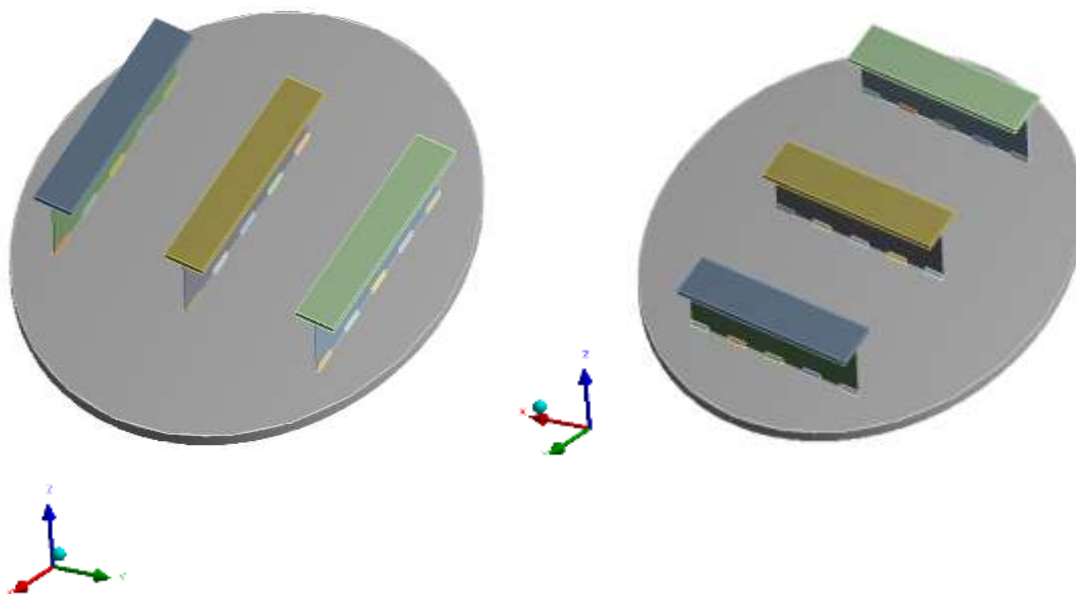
Plate welding shielded metal arc welding process circular plate.
